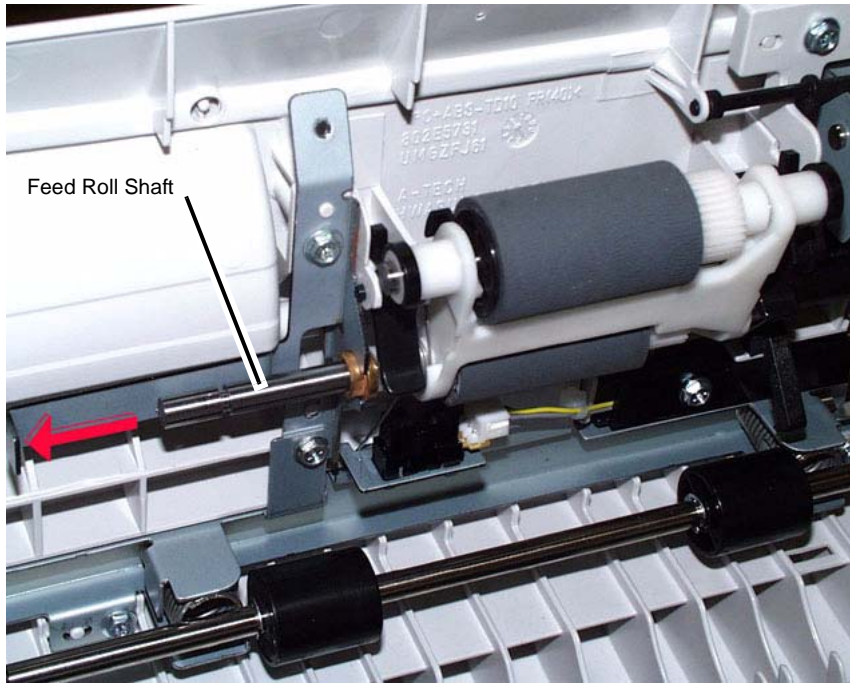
Removing the Feed Roll shaft and the Feed Roll
